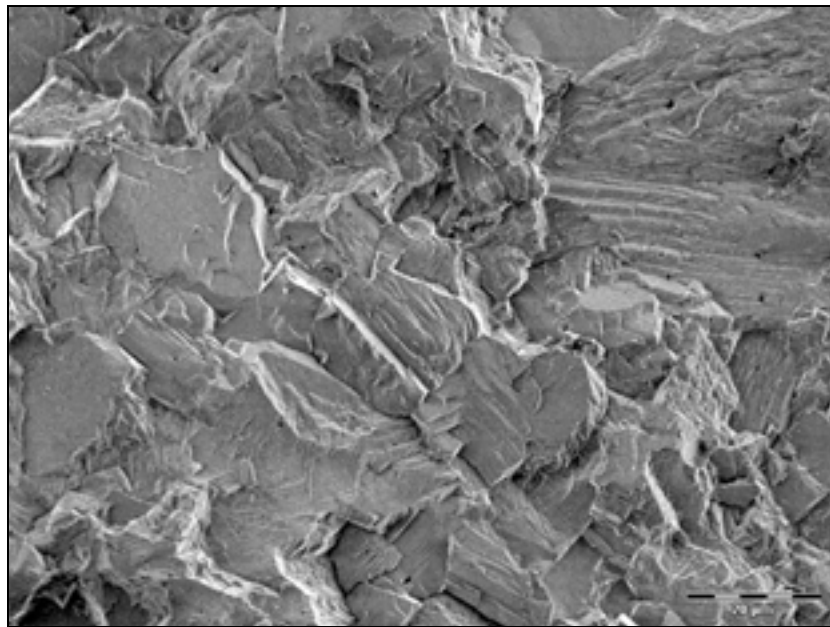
ESEM photo of fracture surface for type I.
